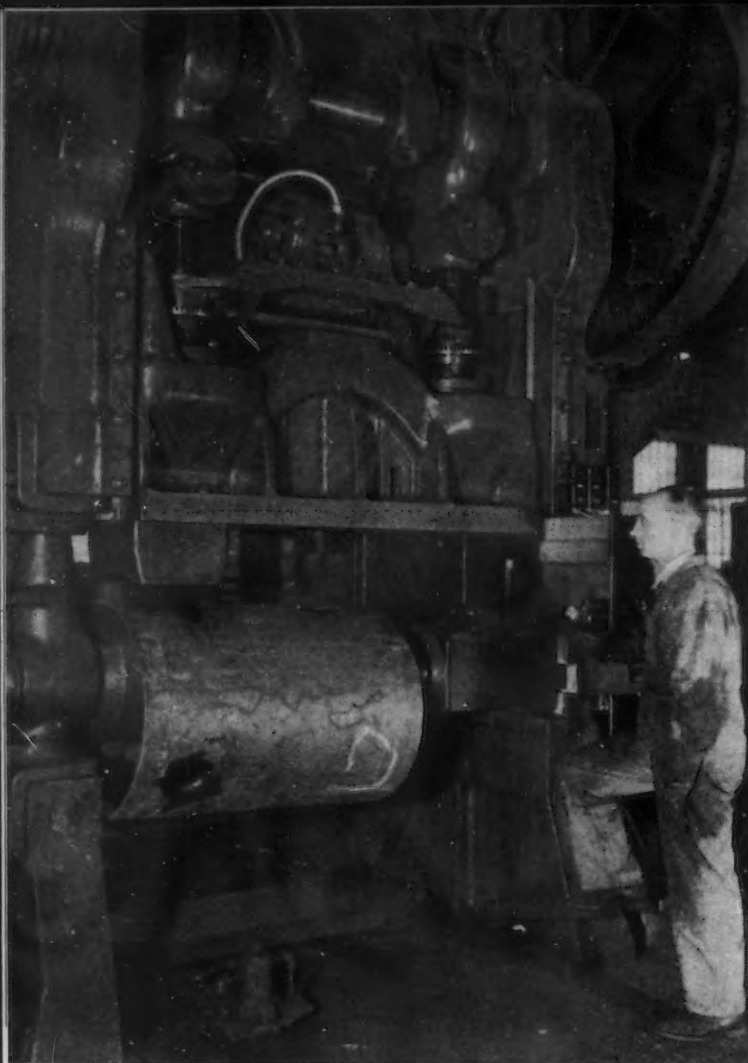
Roll formed boiler shells are flash welded at the seam in this 1000-kva. machine, said to be the largest flash welder built for this type of service.
